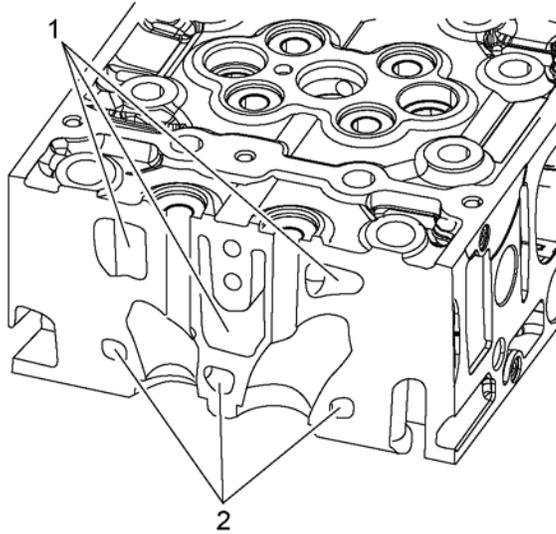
Oil Hole Location on Fire Deck of Cylinder Head
